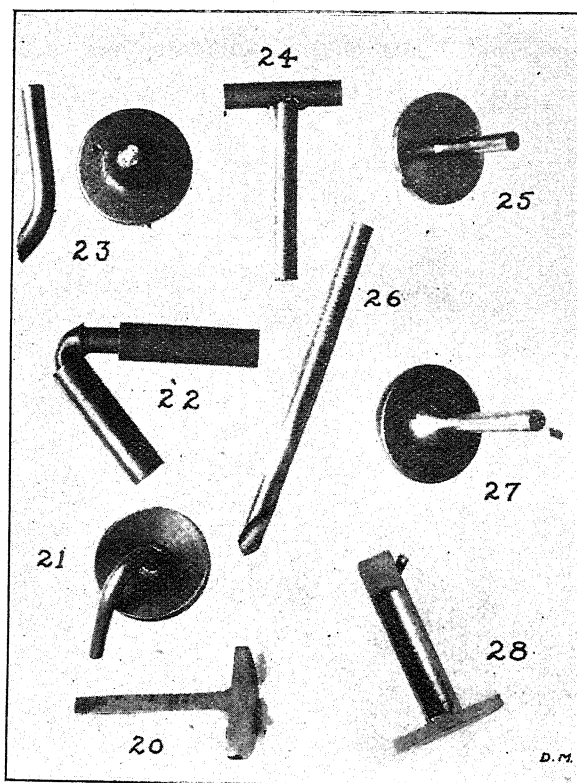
EXAMPLES OF ELECTRO-PERCUSSIVE WELDING
